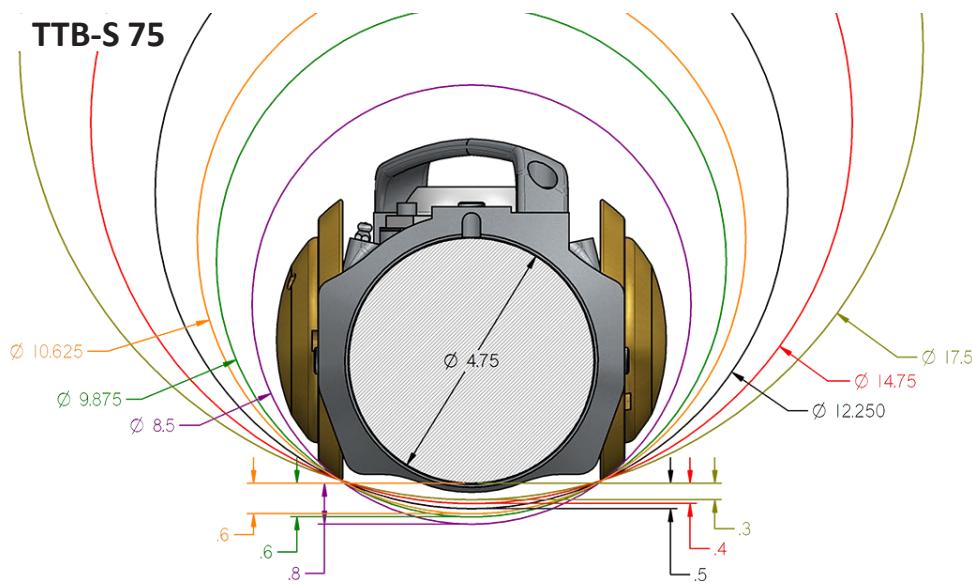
TTB - S75 Standoff for a 4-3/4" Tool
